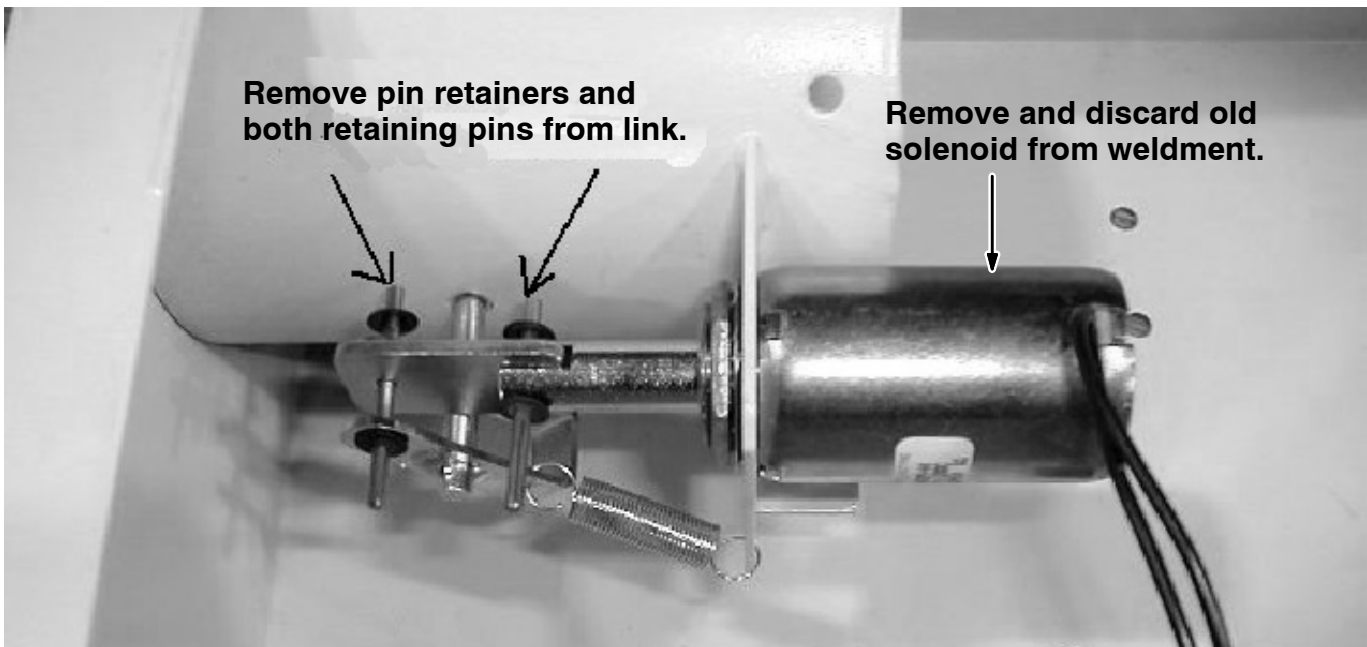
DAMPER SOLENOID REMOVAL, 6100
